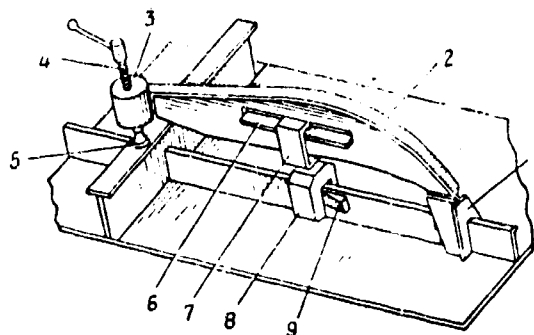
Utilization of "Fish Tail" Device for Compressing the Framing Elements to the Planking without Welding the Support: 1- support; 2- housing of device; 3- nut; 4- screw; 5- support; 6- guiding strip; 7- small clip; 8- clamp; and 9- wedge.
